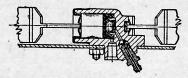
Brake shoe hydraulic expander unit (4AB).
